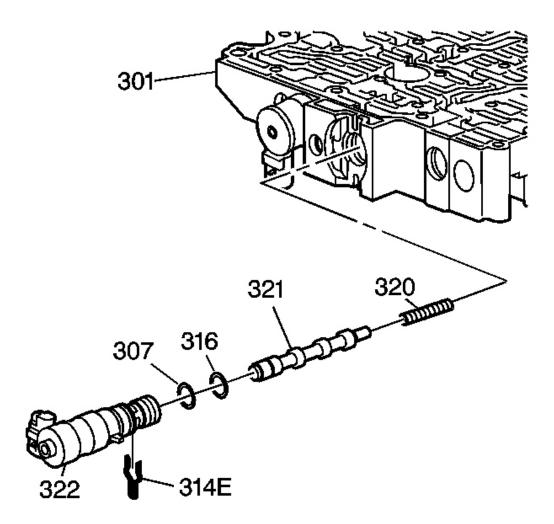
View Of PC Solenoid Valve & Torque Signal Regulator Valve Courtesy of GENERAL MOTORS CORP.
